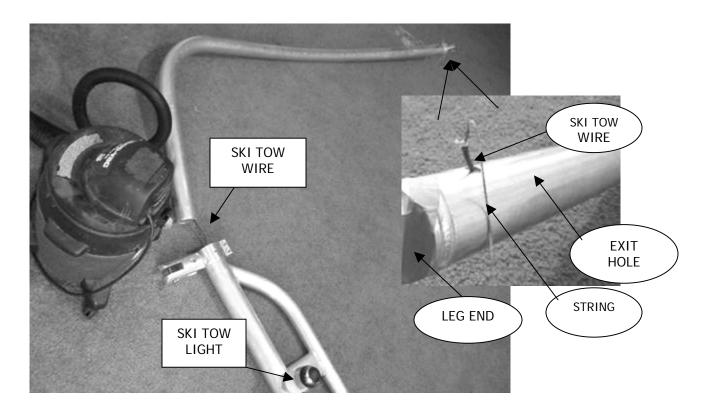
Ski Tow Wire Threading (different tower model may be pictured)
